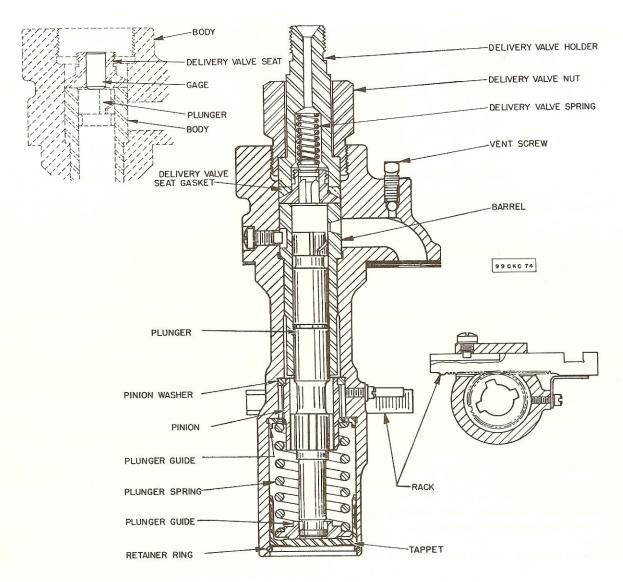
Injection Pump and Setting Gage "VB" Pumps
